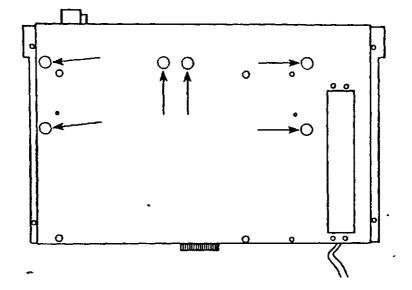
MD I/MD II Drive Removal - Revision A Chassis
